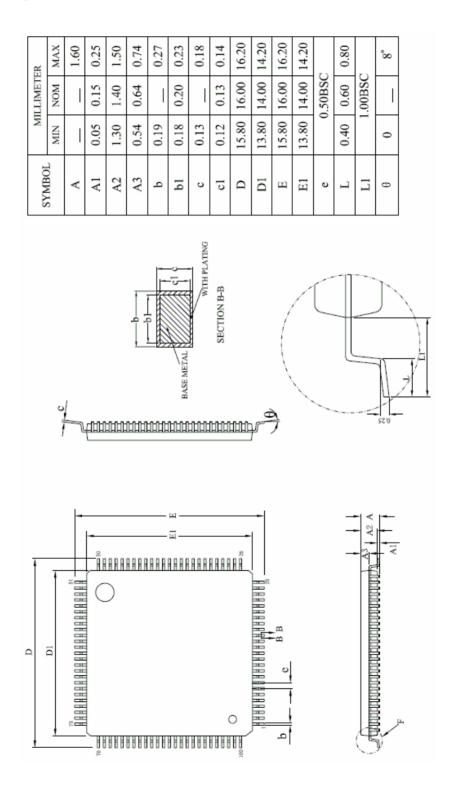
LQFP100-14x14mm Package Dimension Parameter
